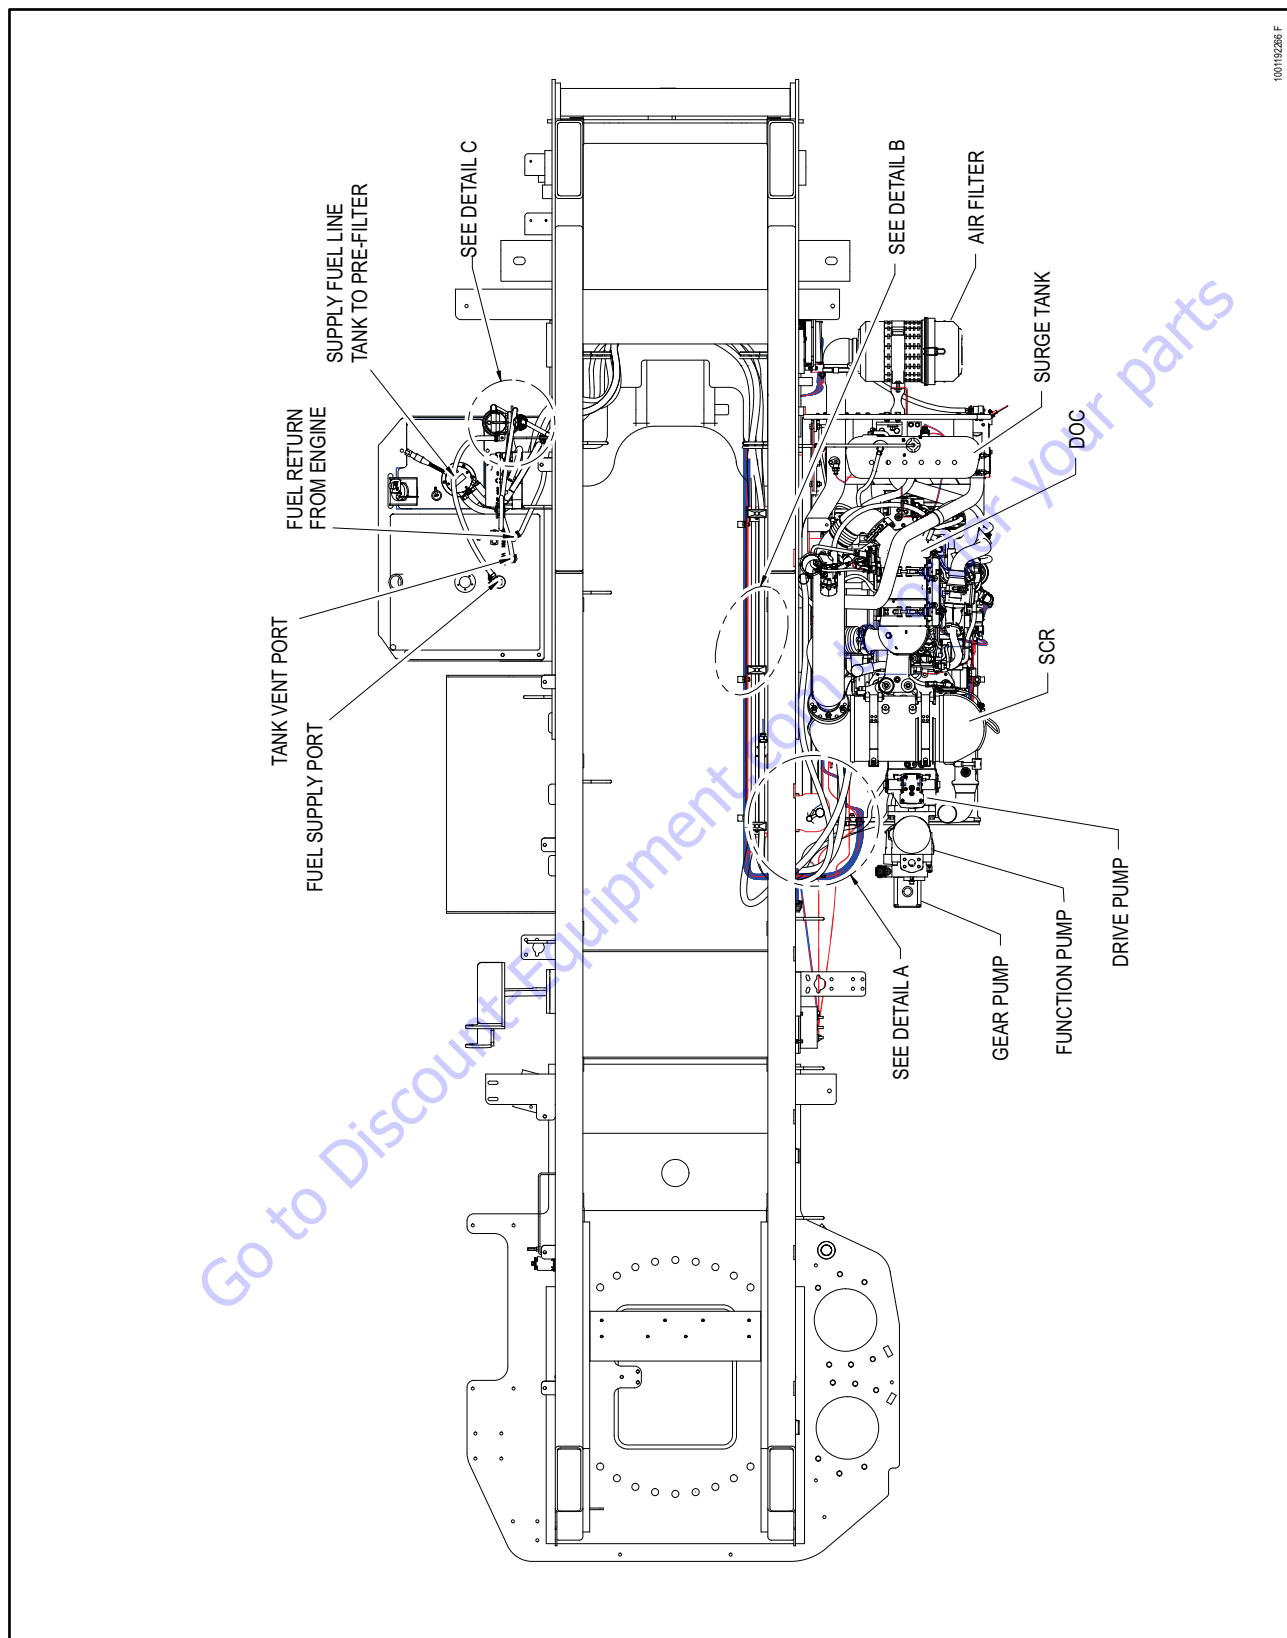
Engine Installation and Diesel Exhaust Fluid (DEF) System - Sheet 1 of 8
